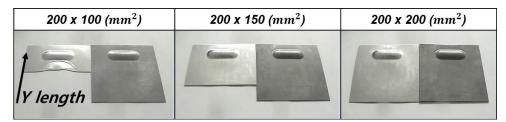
Deformed shape of DP780 workpiece sheets after electromagnetic forming with the different sizes of AI1050 driver plate.
